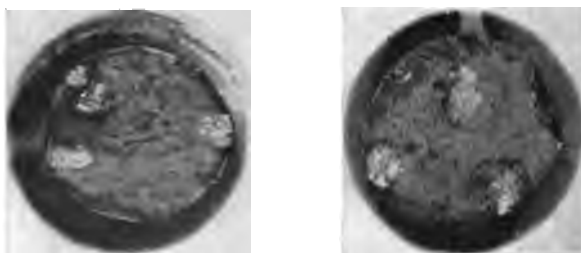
FRACTURES TEST-BAR 948A. SAME FORGING AS FIG. 23 AFTER AN ANNEAL, TWO QUENCHES AND A DRAW. $\times 2$.
